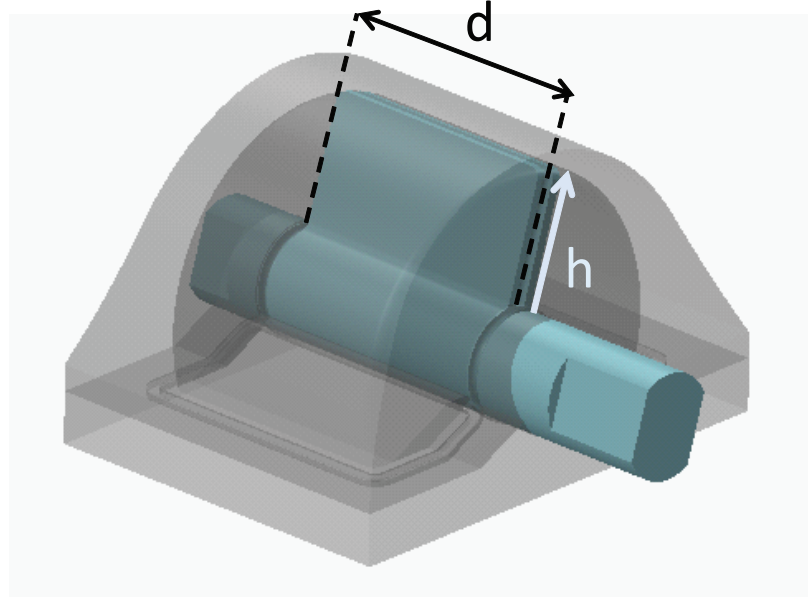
Proposed rotational actuator with rotor dimensions.
